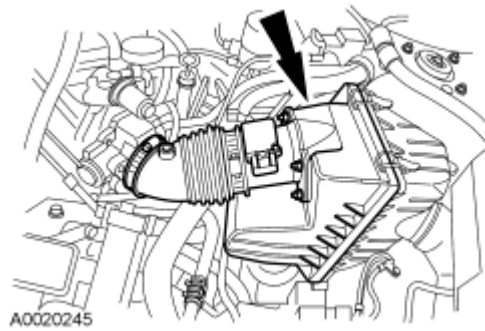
Locating Intake Tube & Air Cleaner Cover
